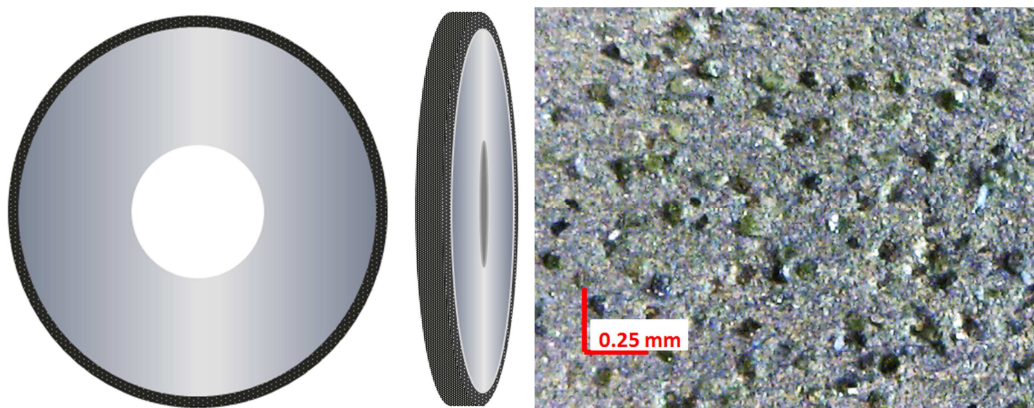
Metal bond grinding wheel and magnified working surface.
